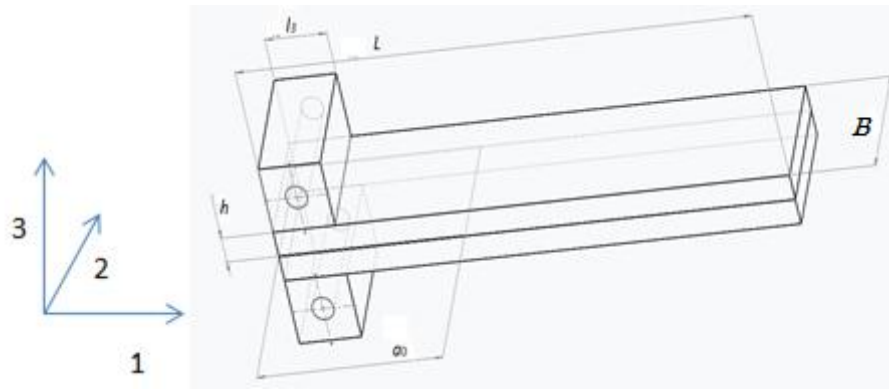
Geometry of a DCB specimen with load blocks [116].
